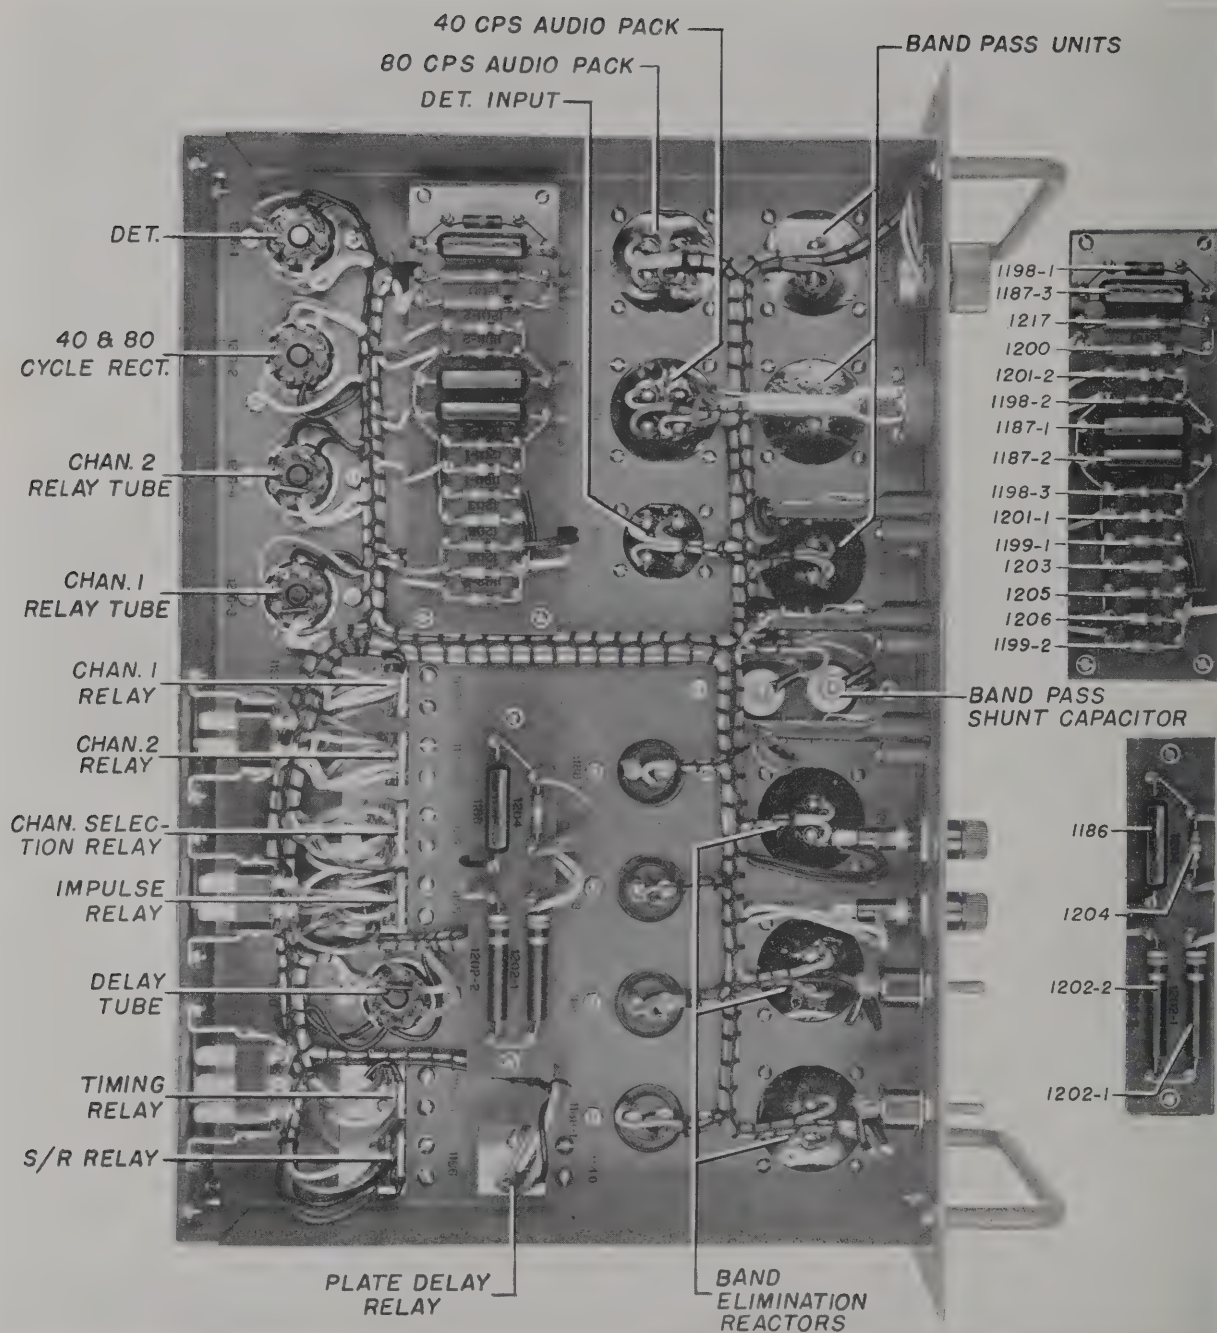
Type CRB-23368 SELECTOR UNIT, BOTTOM VIEW, COVER REMOVED
